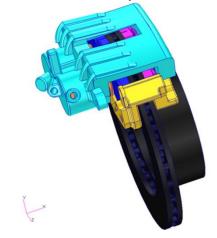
CAD model of brake system with dual-piston clamping system [5]
